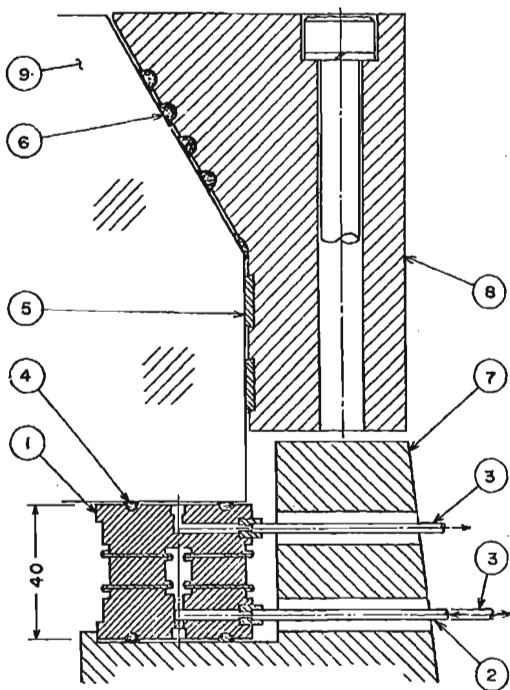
Cross section of the inflatable gasket for making vacuum seal between the viewing window glass and the bubble chamber vessel. (1) inflatable gasket, (2) pressure inlet line, (4) indium seal, (5) Teflon protection ring, (6) indium protection ring, (7) chamber body, (8) Ti-window frame, (9) viewing window glass.
